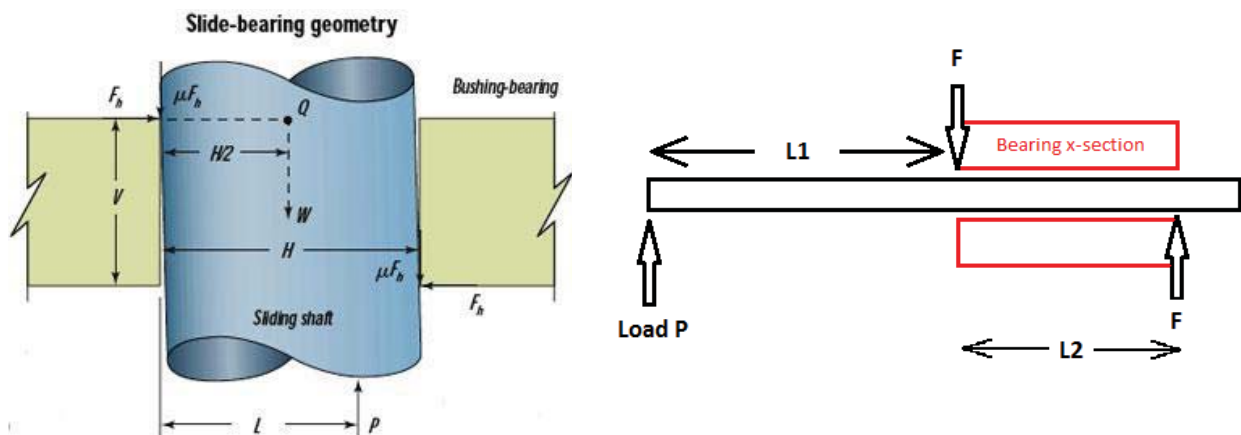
Left, Geometry of shaft-locking forces and torques; Right, Geometry based off of our design
